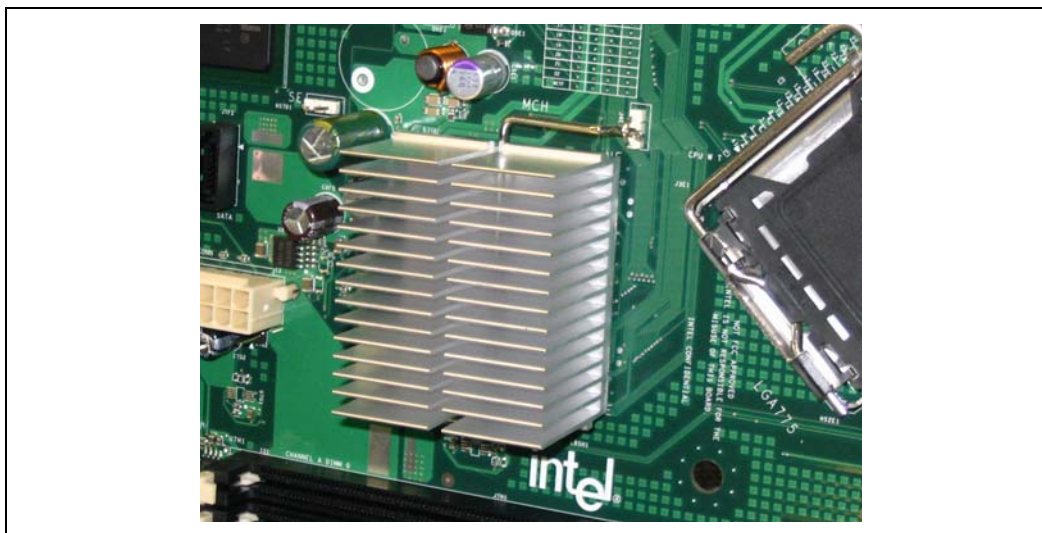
Balanced Technology Extended (BTX) GMCH Heatsink - Installed on Board
